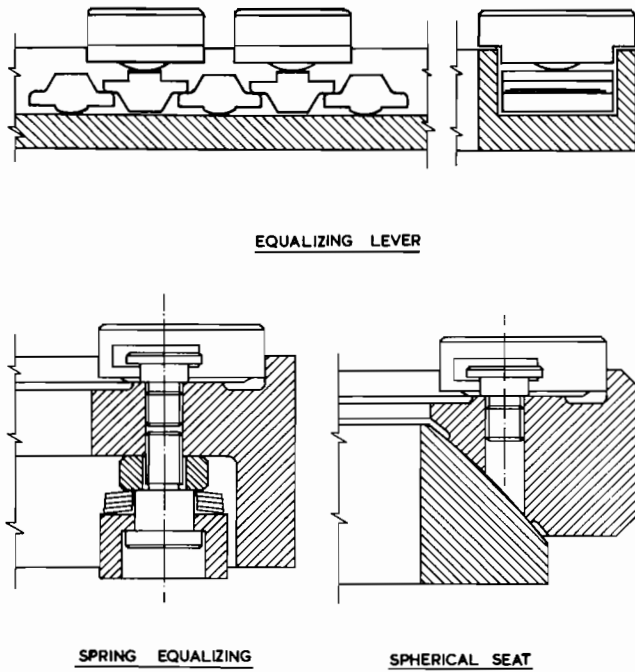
Misalignment Compensation Devices for Tilting Pad Thrust Bearings.
